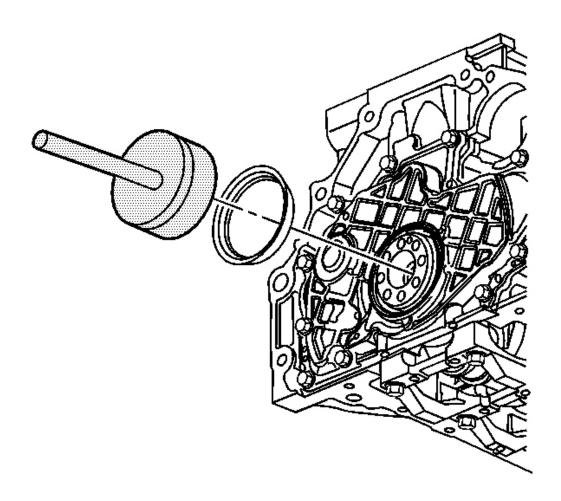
Installing Crankshaft Rear Oil Seal Courtesy of GENERAL MOTORS CORP.
